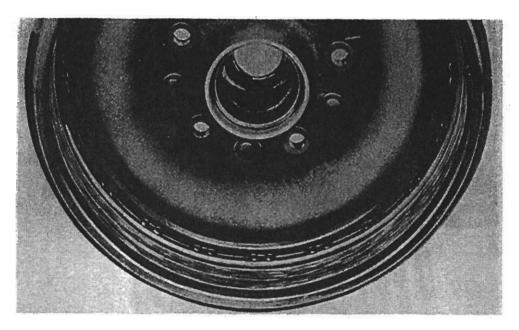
It Is Necessary to Reface a Brake Drum if Its Braking Surface Has Become Deeply Scored.
